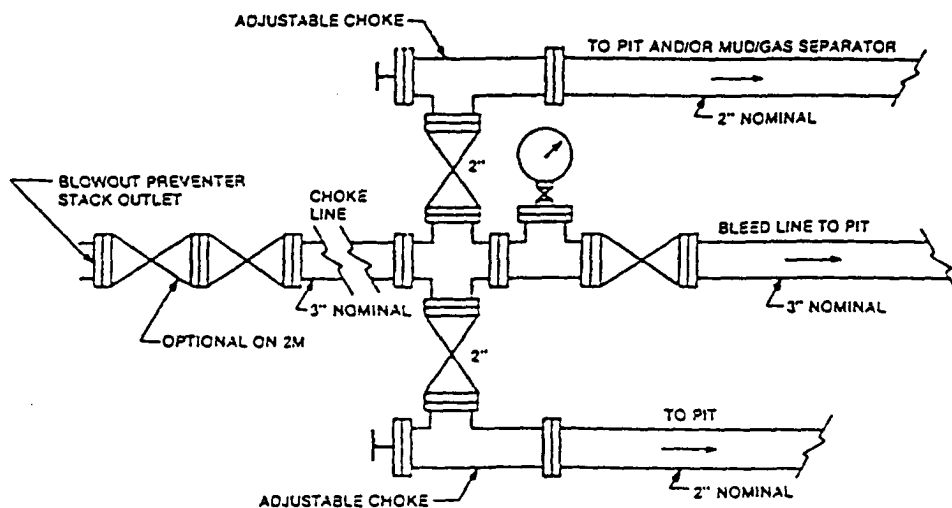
Typical choke manifold assembly for 2M and 3M rated working pressure service — surface installation.
